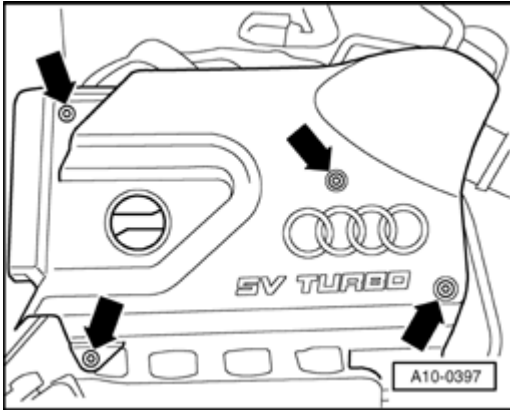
Removing Engine Cover Panel Above Cylinder Head
